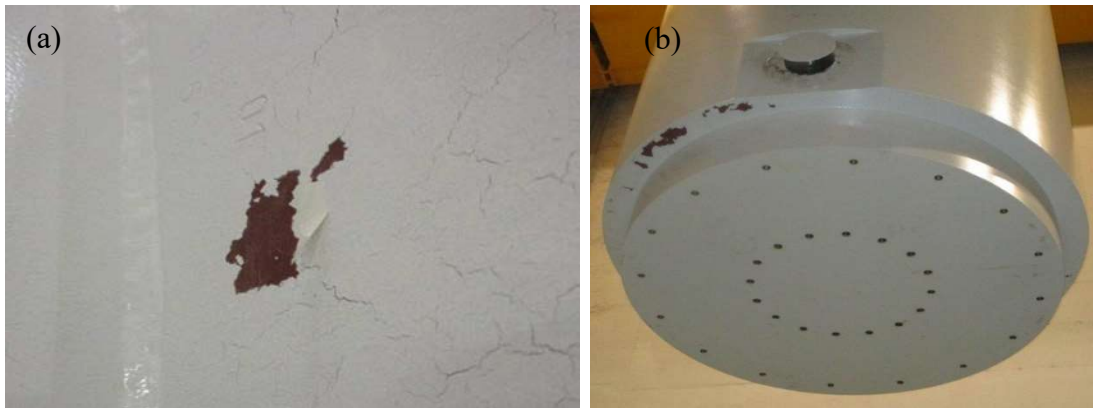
Examples of defects on the outer protective coating of metal casks (courtesy of ENSA).
